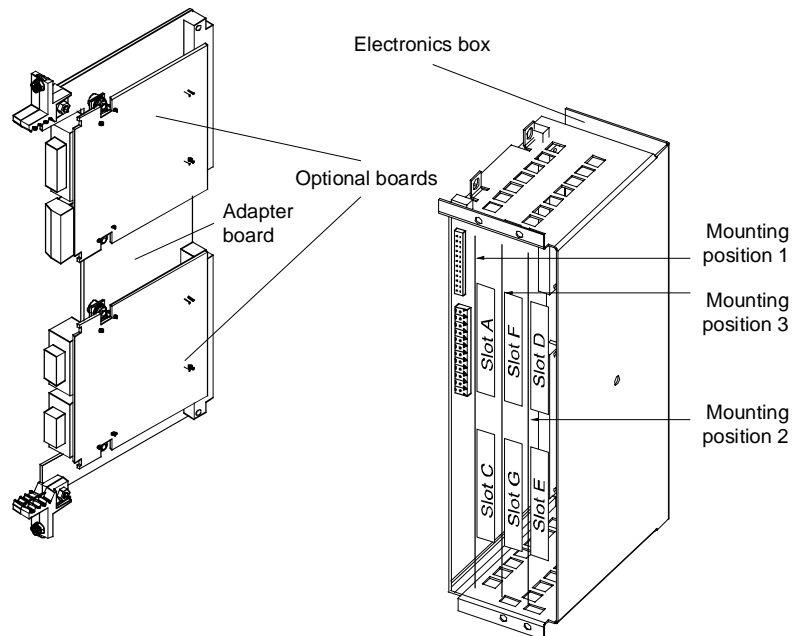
Adapter board with optional boards and position of the slots for compact and chassis units
